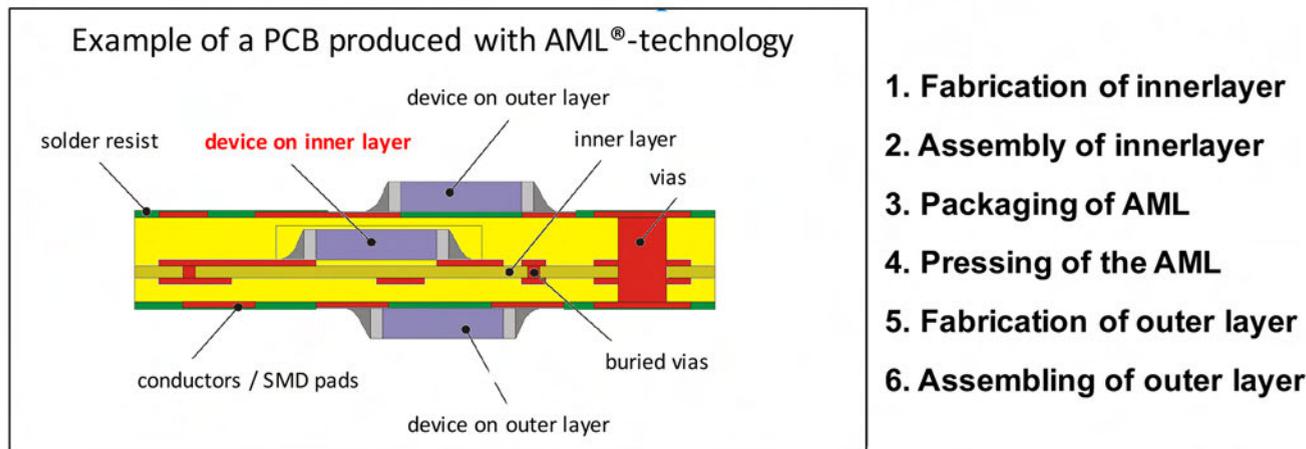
The fabrication process for embedding devices in PCBs, Part 2.
